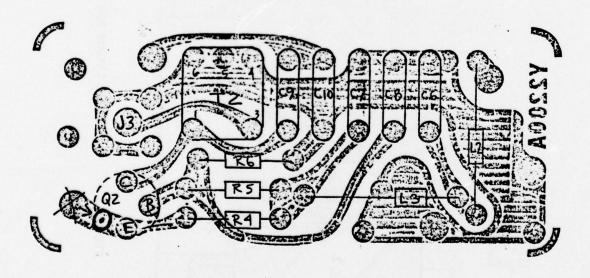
P.C. BOARD LAYOUT FOR A1600A VHF TUNER POWER SUPPLY ASSEMBLY
